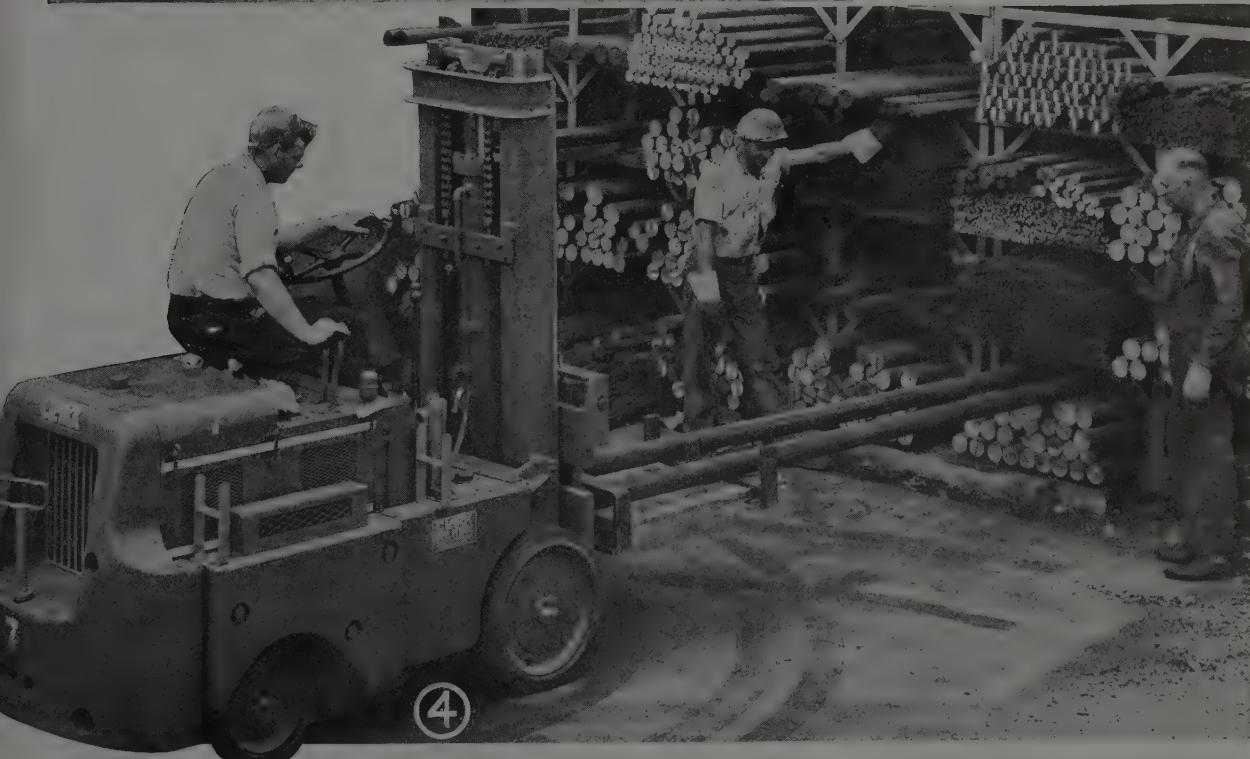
Special bar-handling rig enables fork truck to push bars into rack
